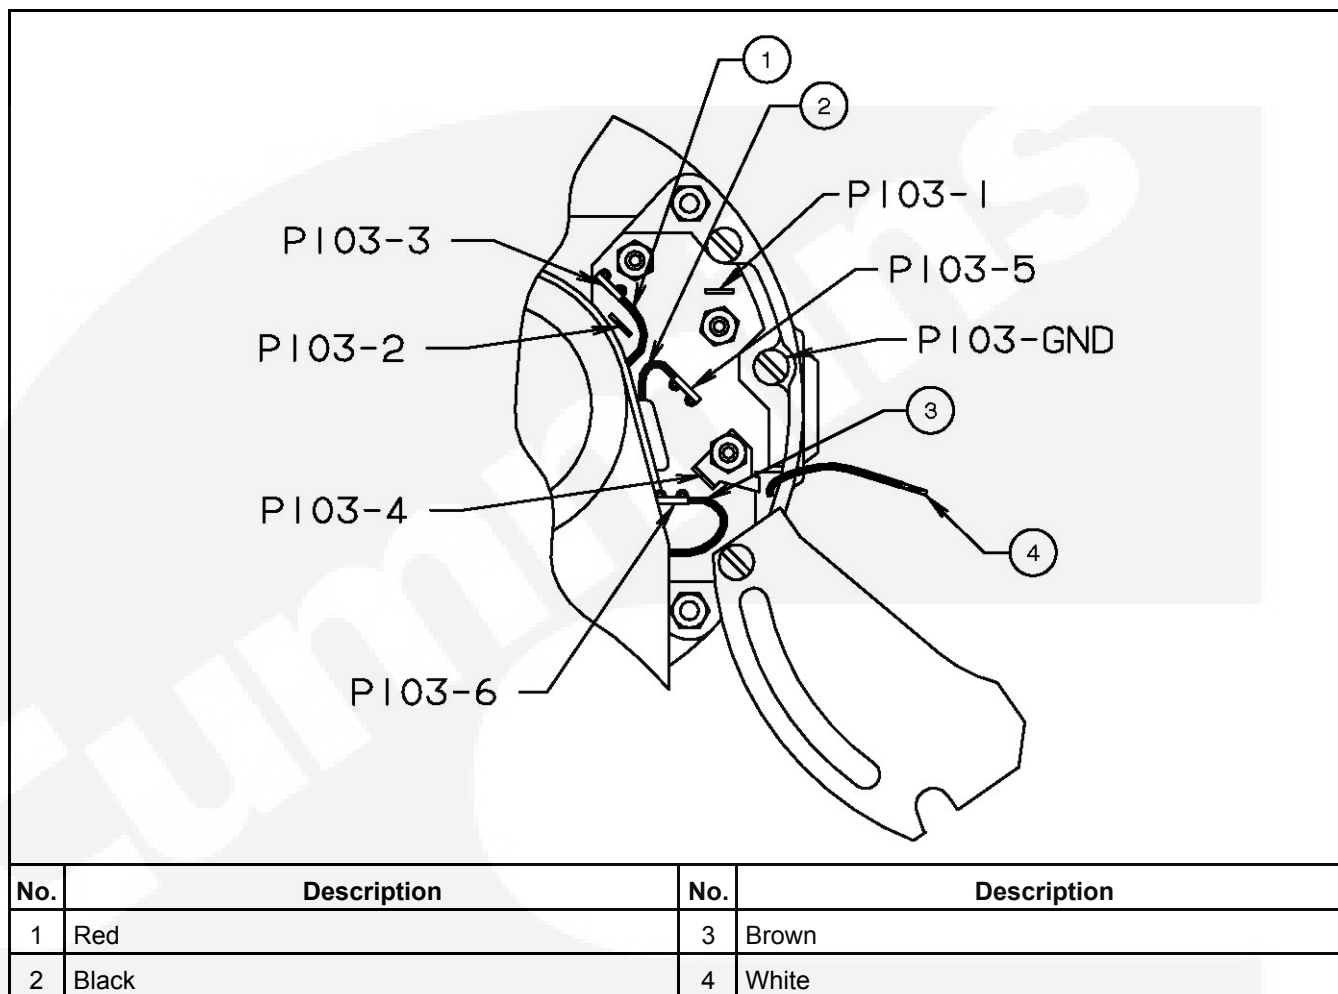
FUEL TRANSFER PUMP MOTOR CONNECTIONS
